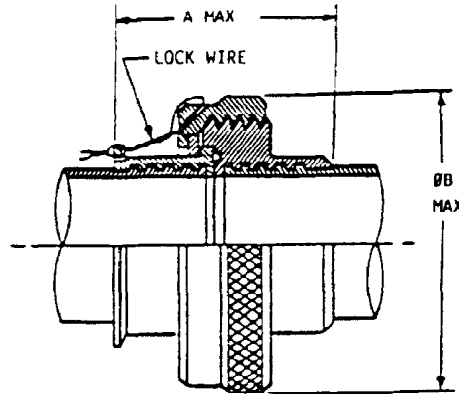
TYPE I COUPLING - ASSEMBLED VIEW
